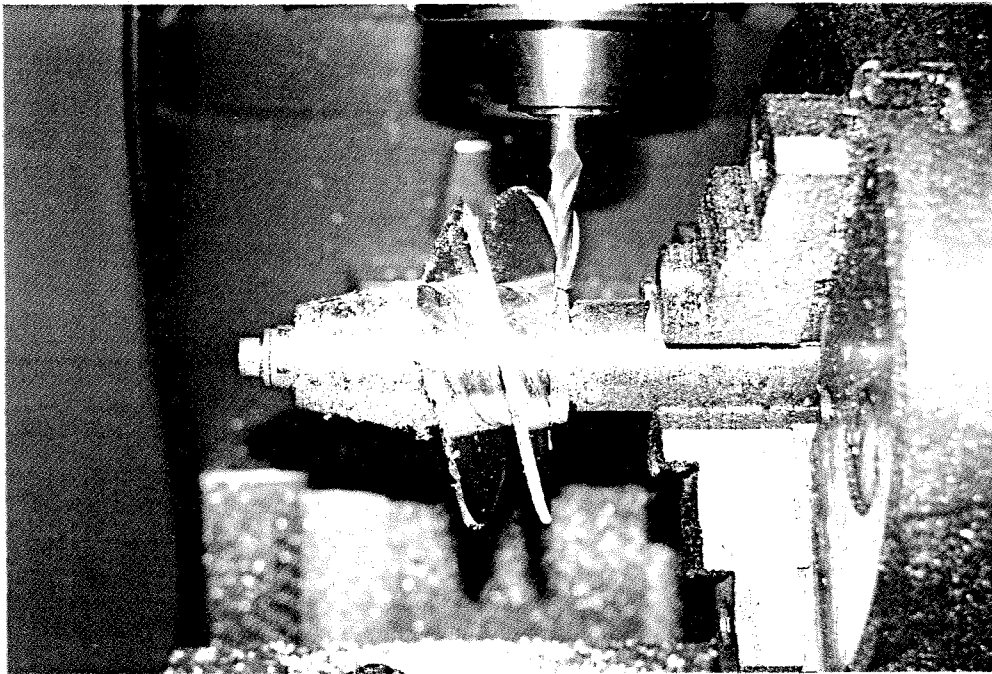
Photographs showing the machining of inducer IX and the indexing head.
